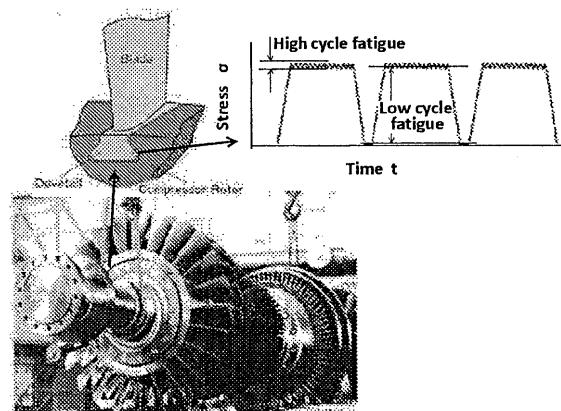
Assembled gas-turbine compressor rotor and blade dovetail joint
